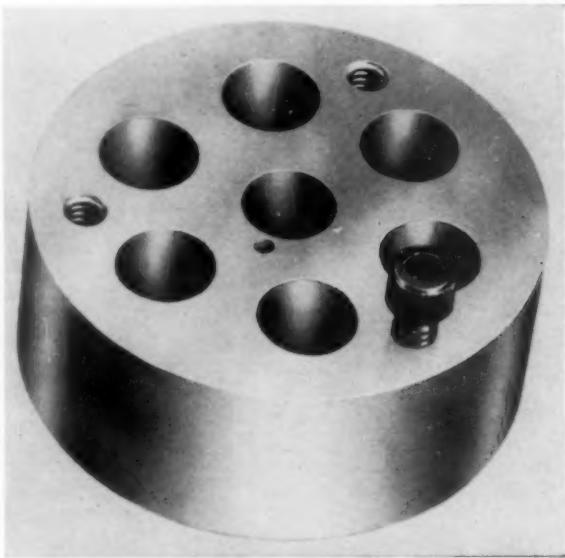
Sintered carbide can be threaded conveniently for incorporating screw fasteners.
